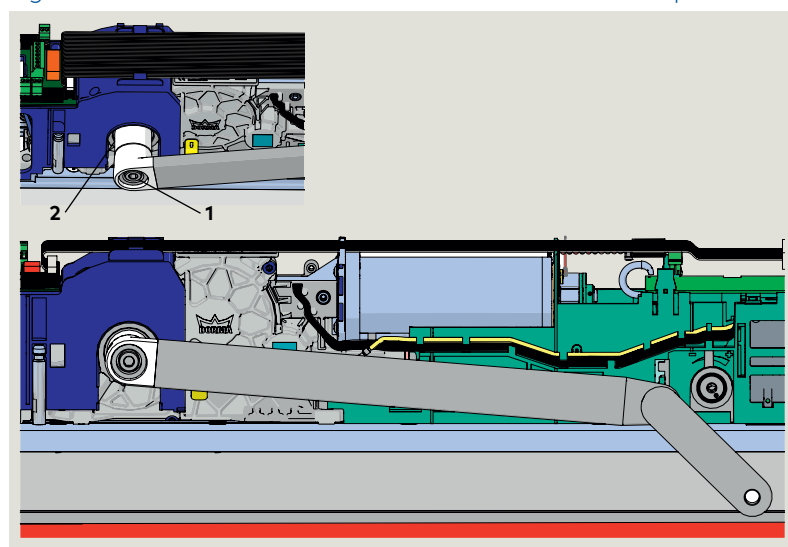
Install drive arm and extension onto ED50LE spindle
